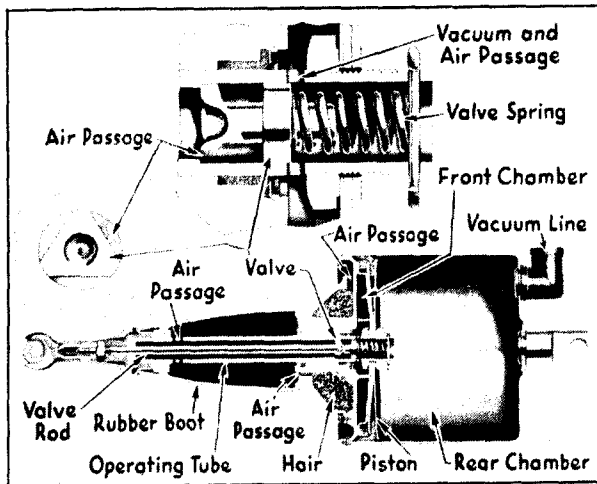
Sectional views of brake assister used on 345-C and 355-C cars
